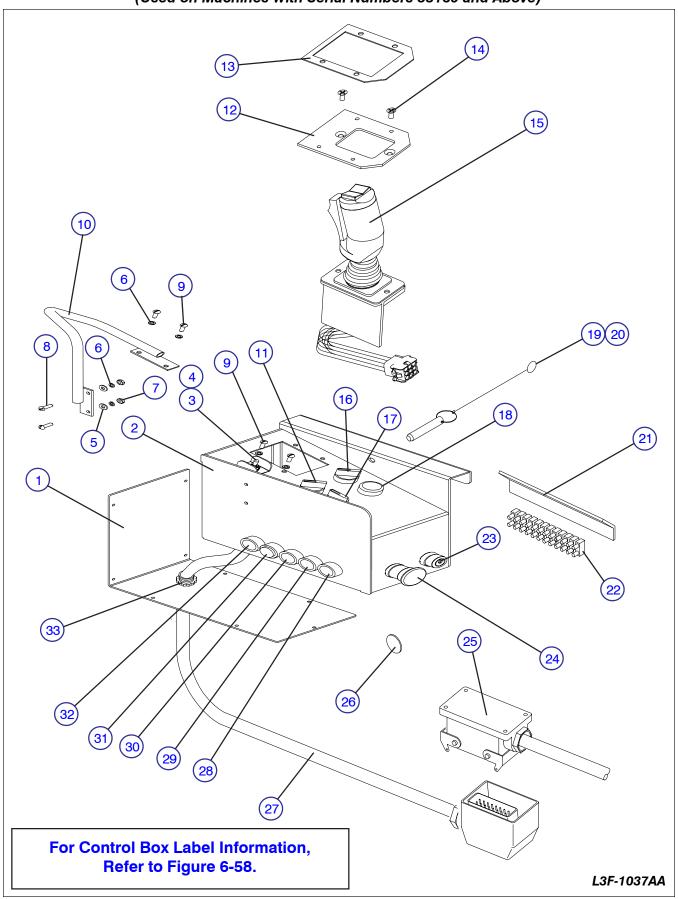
A. CONTROL BOX ASSEMBLY (Used on Machines With Serial Numbers 33189 and Above)
